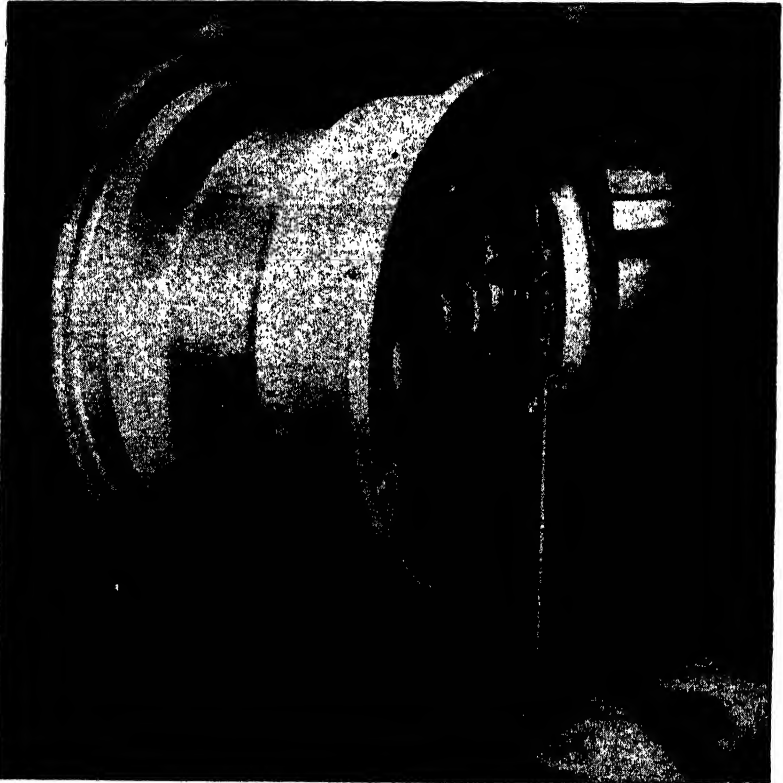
Checking a magnesium aircraft-landing-wheel casting for accuracy.
